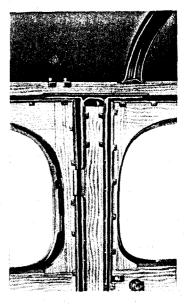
Illustration No. 37 Center Body Pillar to Roof Rail Brace.
